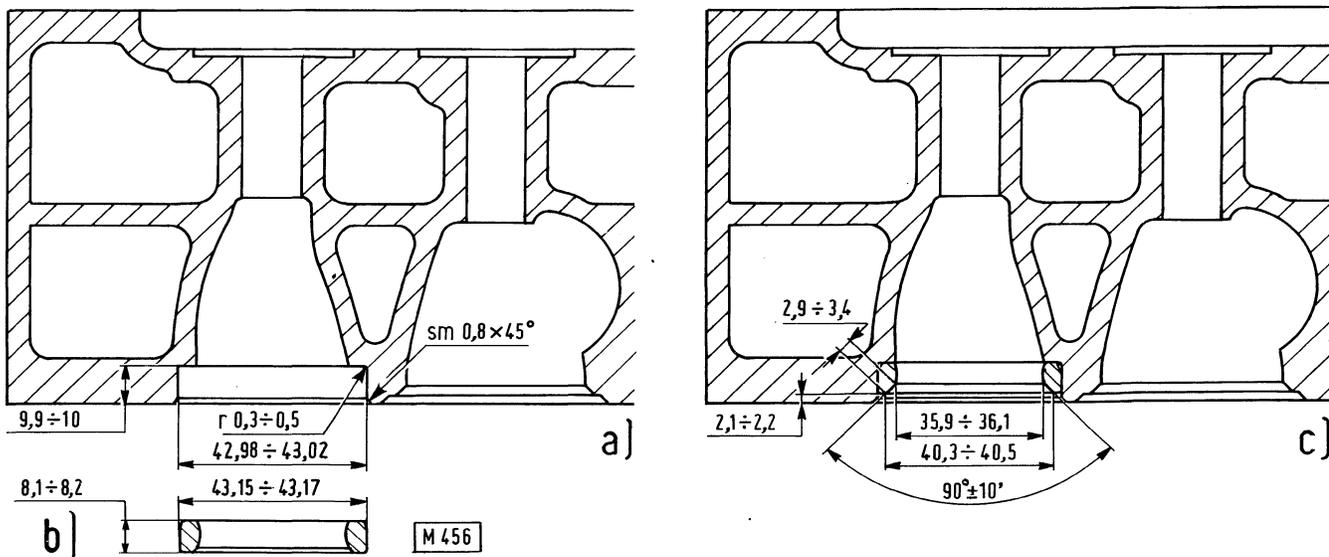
Exhaust valve seat insert details - a. Valve seat insert housing - b. Seat insert - c. Valve seats on insert.
